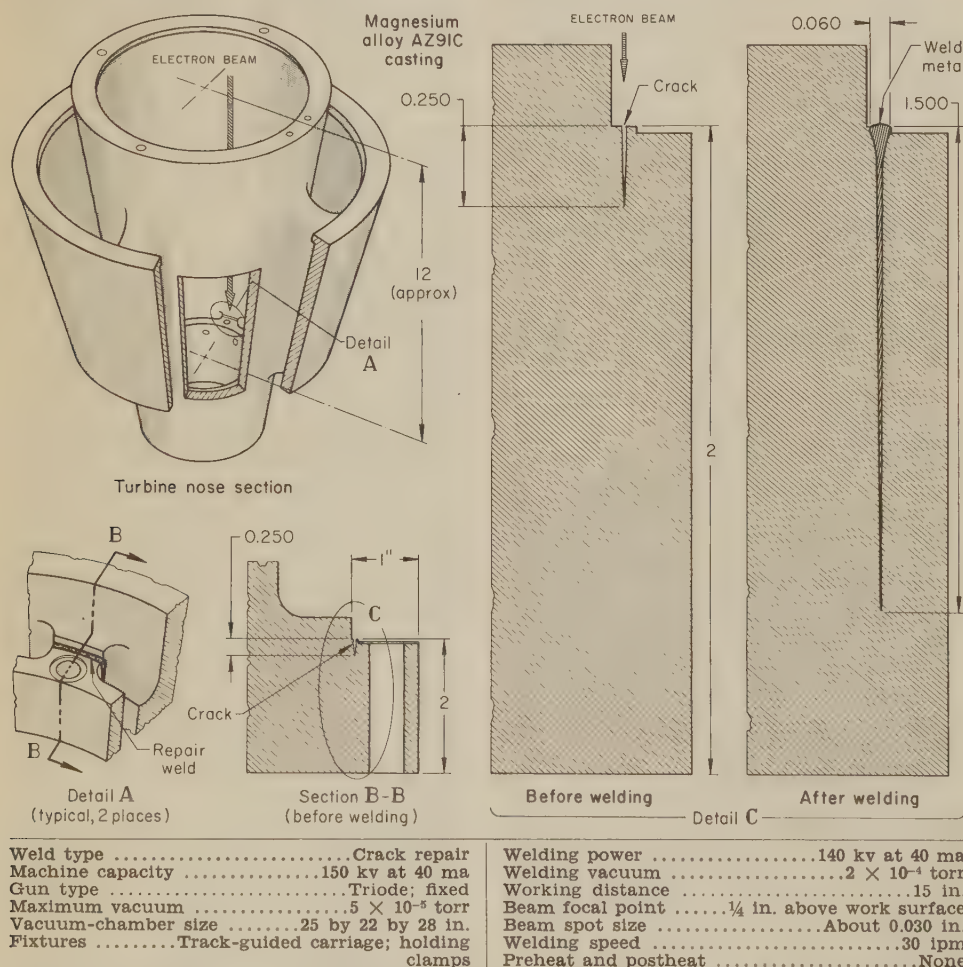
Nose section of a turbine engine showing method of repairing two fatigue cracks by electron beam welding. Limited access and likelihood of distortion precluded the use of other welding processes. (Example 479)
